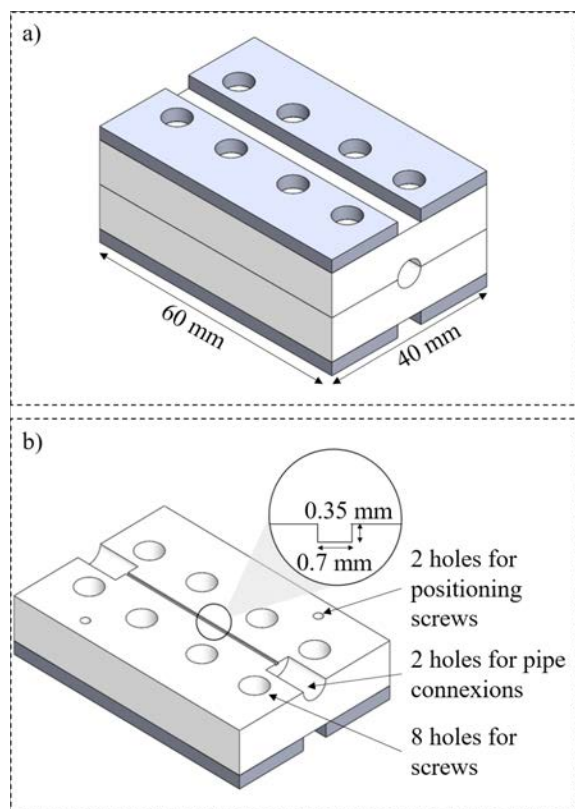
Acrylic glass chamber, a) 3D view, and b) sectional view
